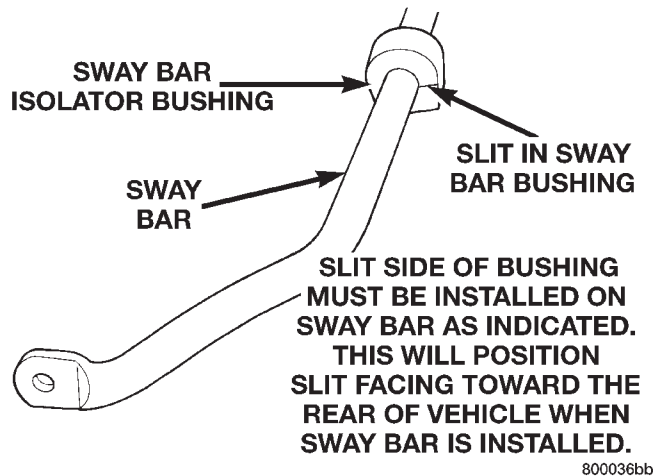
Correctly Installed Stabilizer Bar To Cradle Bushing
